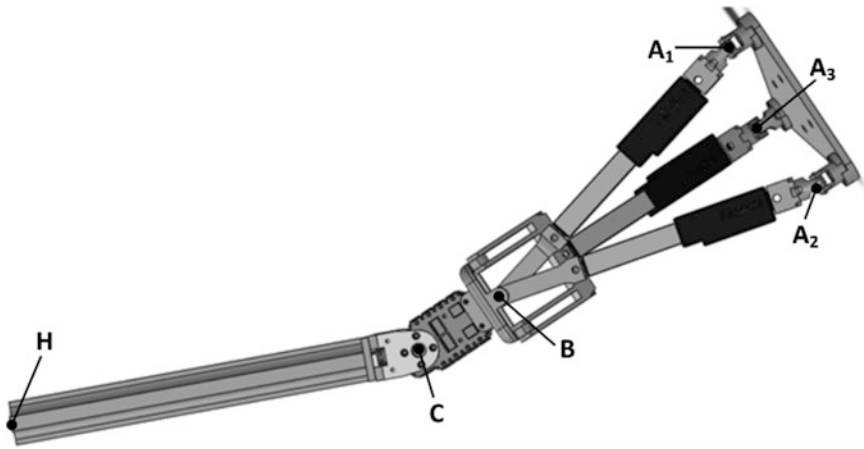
A CAD model of the proposed arm mechanism in Fig. 1
